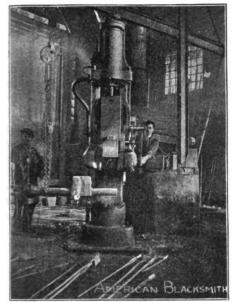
HAMMER FOR MAKING CRANKS AND KING PINS ON STEAM ROLLERS.
